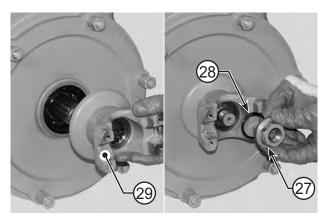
Assemble flange (29), o-ring (28) and nut (27) using Loctite 242.
